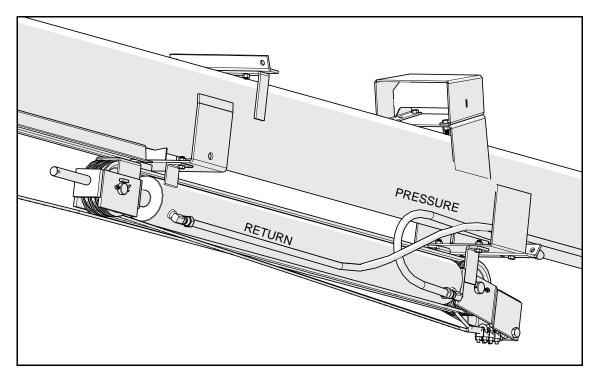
MKX100-83 Hydraulic Hose Cylinder Connections
